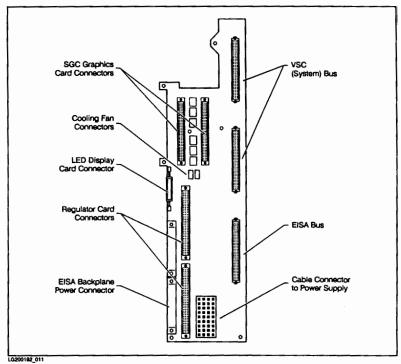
12. VSC Backplane Assembly Mounted in the A1095 System Unit
